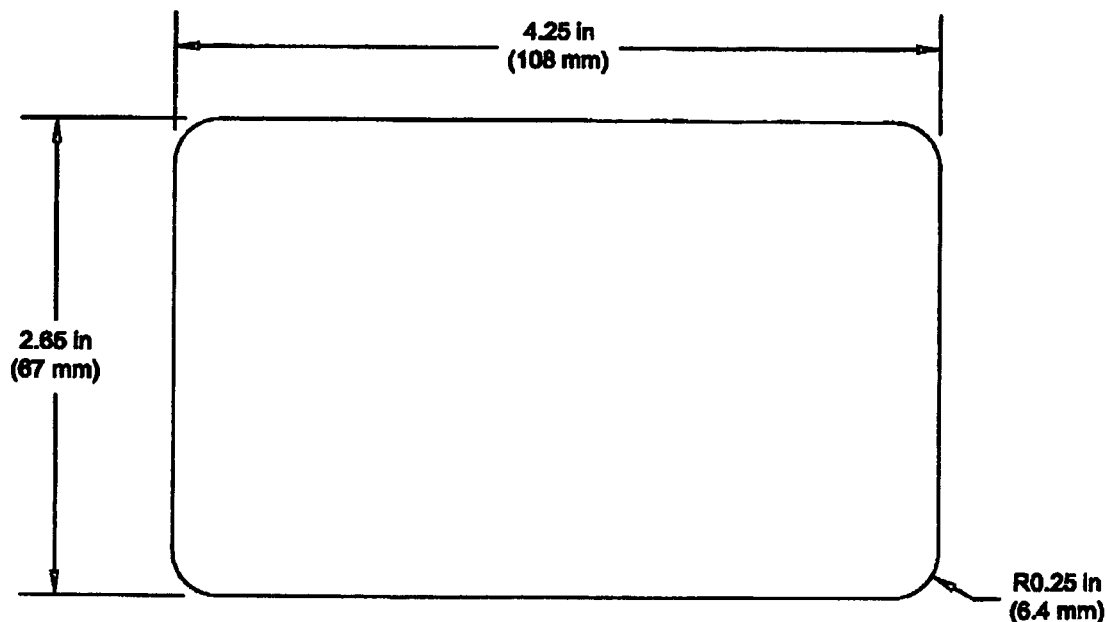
Fwd Crosstube Shim Dimensions (D5305-1 Shim)
